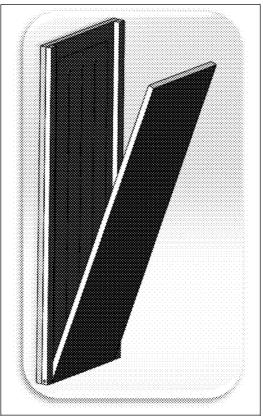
Drawing of mold designed to manufacture sections of the strip curtains used in an EDS
